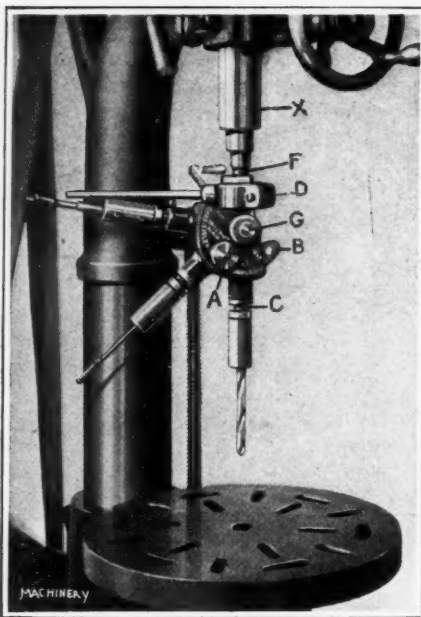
Eisler Three-spindle Turret Head for Use on Drill Press
